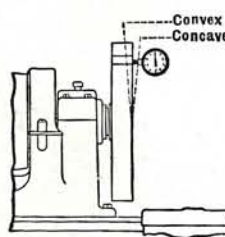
Testing Squareness of Saddle Cross Slide by Machining the Face Plate and Testing with Indicator.
